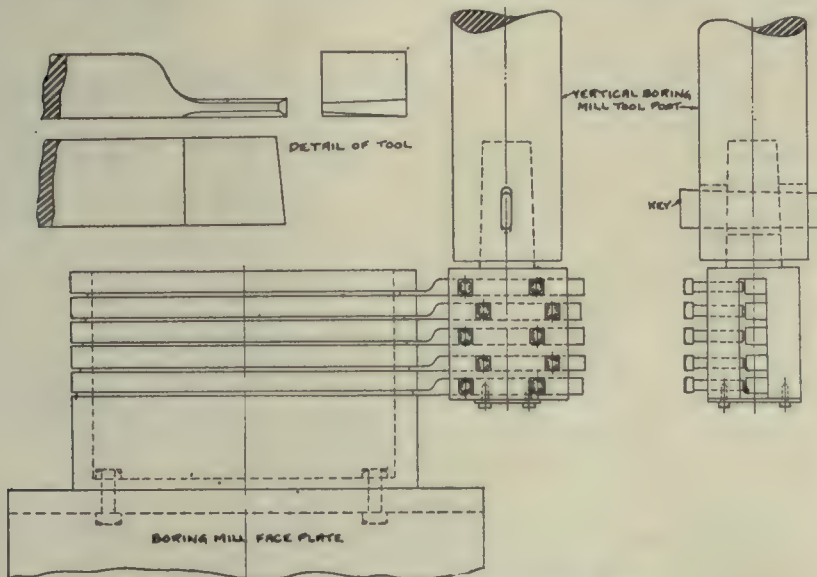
Cook Lang Tool for Cutting Piston Rings.
